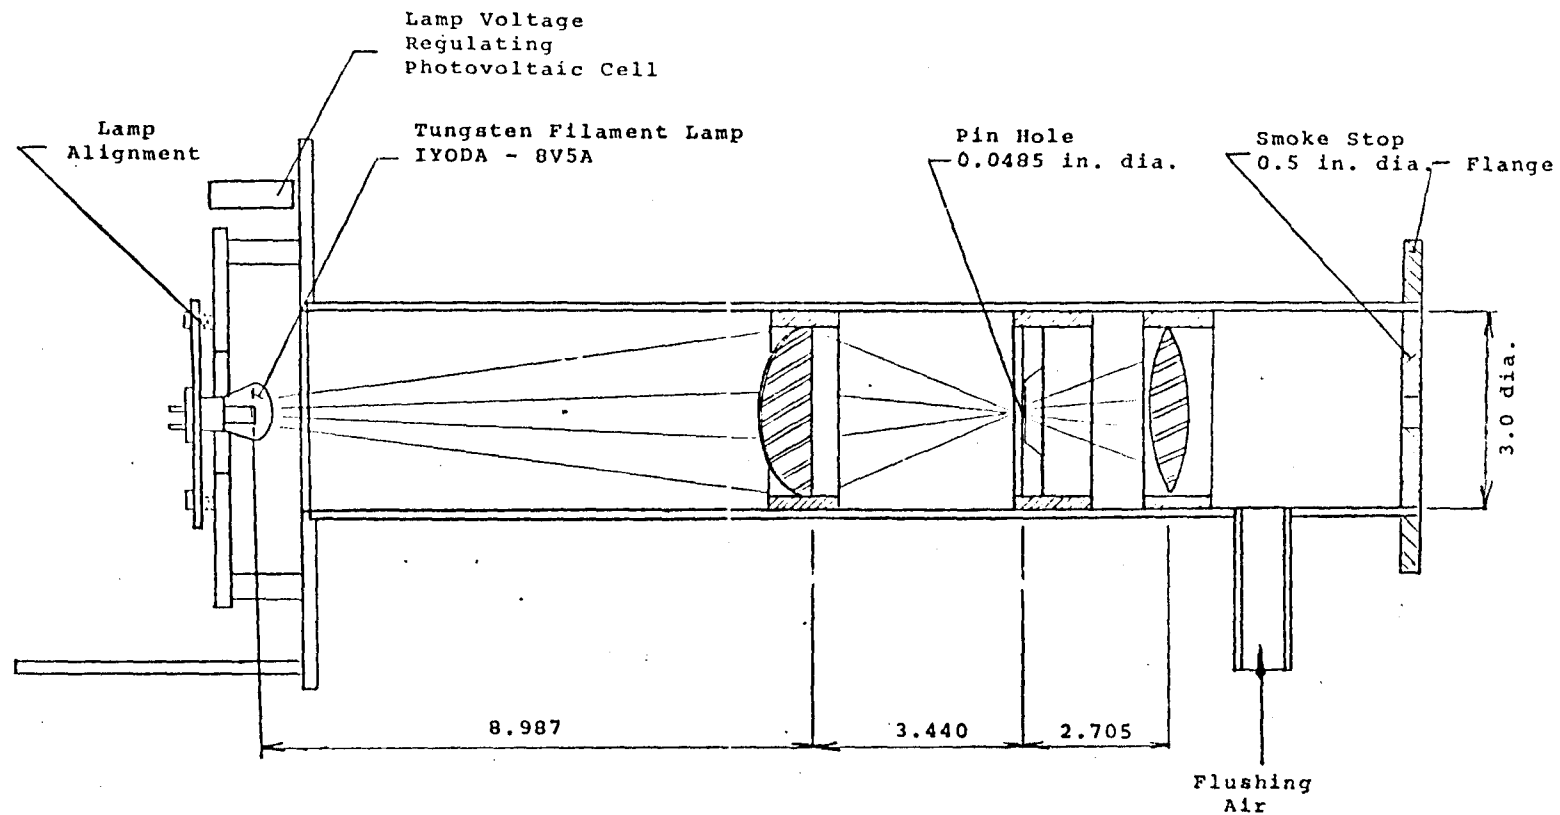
Schematic and Basic Dimensions of the Reference Transmissometer Transmitter.
